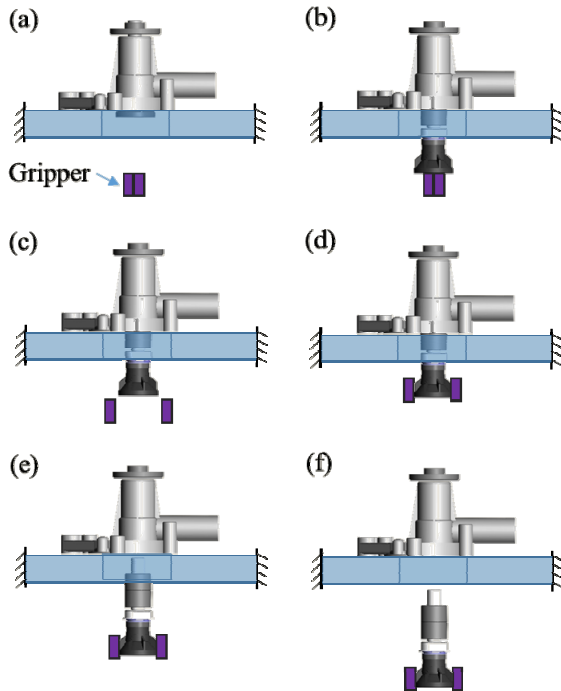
Procedure of separating rotor subassembly from flange and pump casing.
